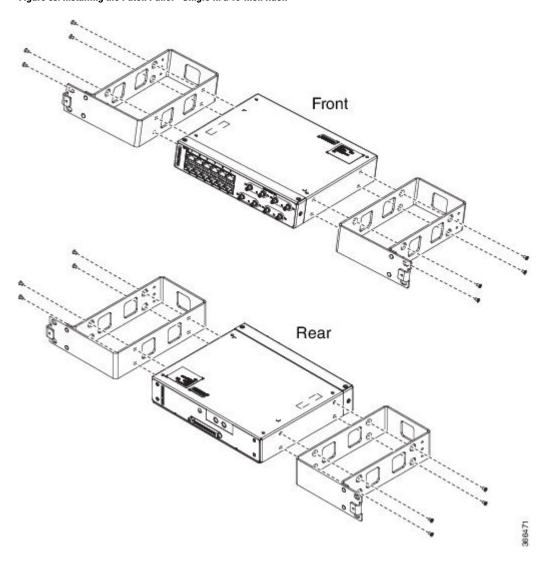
Installing the Patch Panel - Single in a 19-inch Rack
